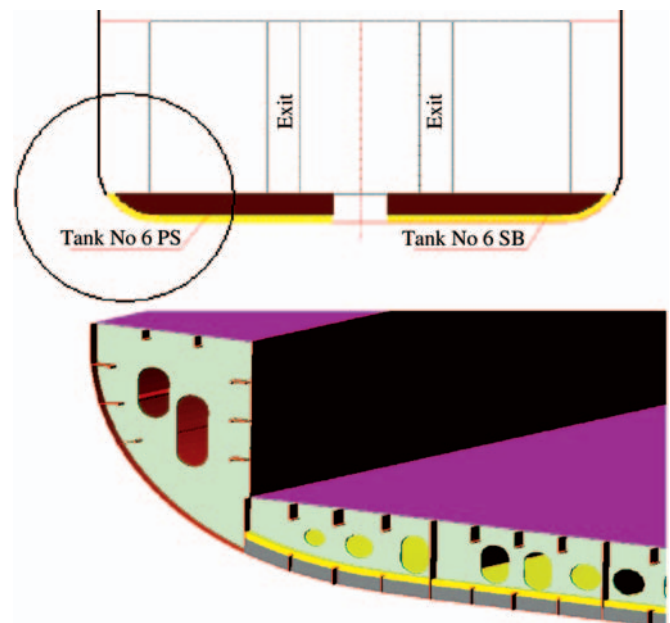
Arrangement of alternative bottom oil fuel tanks on board the containership
